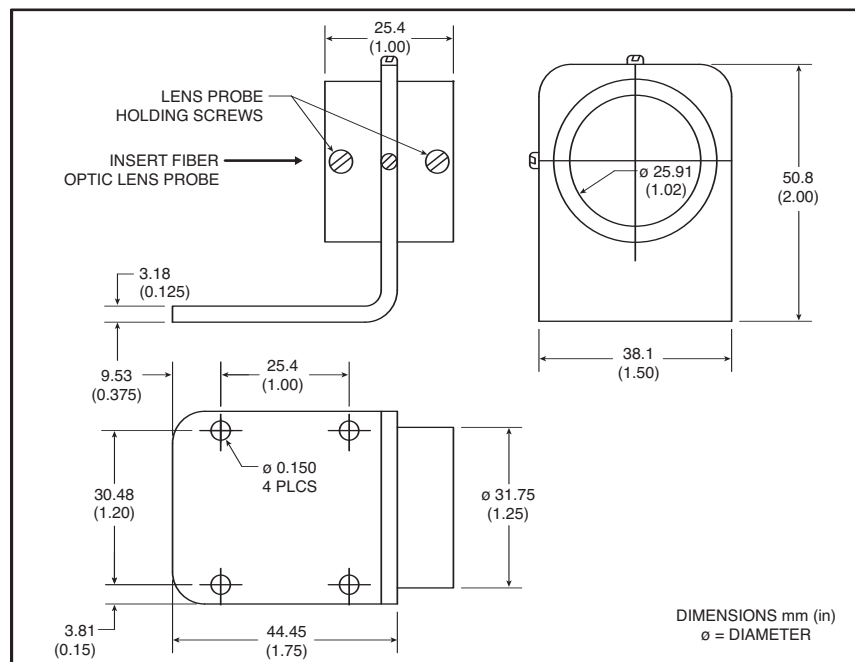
General Dimensions, Lens Probe Mounting Bracket (L1-MB)
